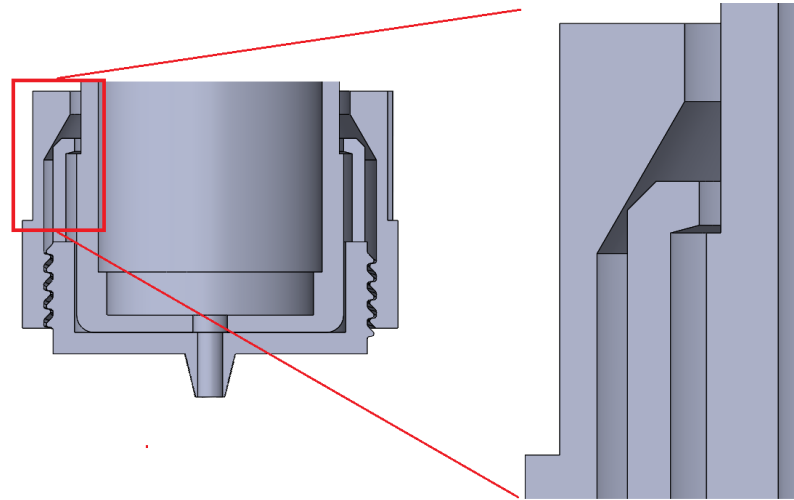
Highlighted part of the section view: the flap has been adapted to include an angled face.
